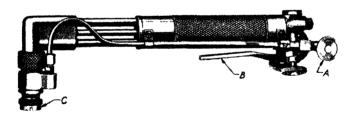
Underwater cutting torch: A. air control valve, B. cutting oxygen control valve, C. metal cap surrounding the cutting tip. Note the slot which allows the air and combustion gases to escape
